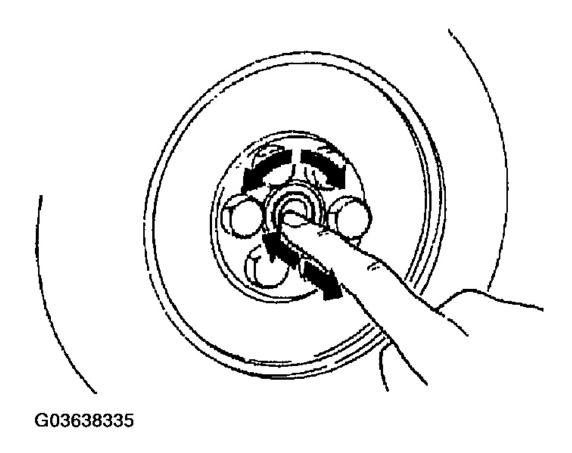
Turning Bearing While Applying Force Courtesy of MAZDA MOTORS CORP.
